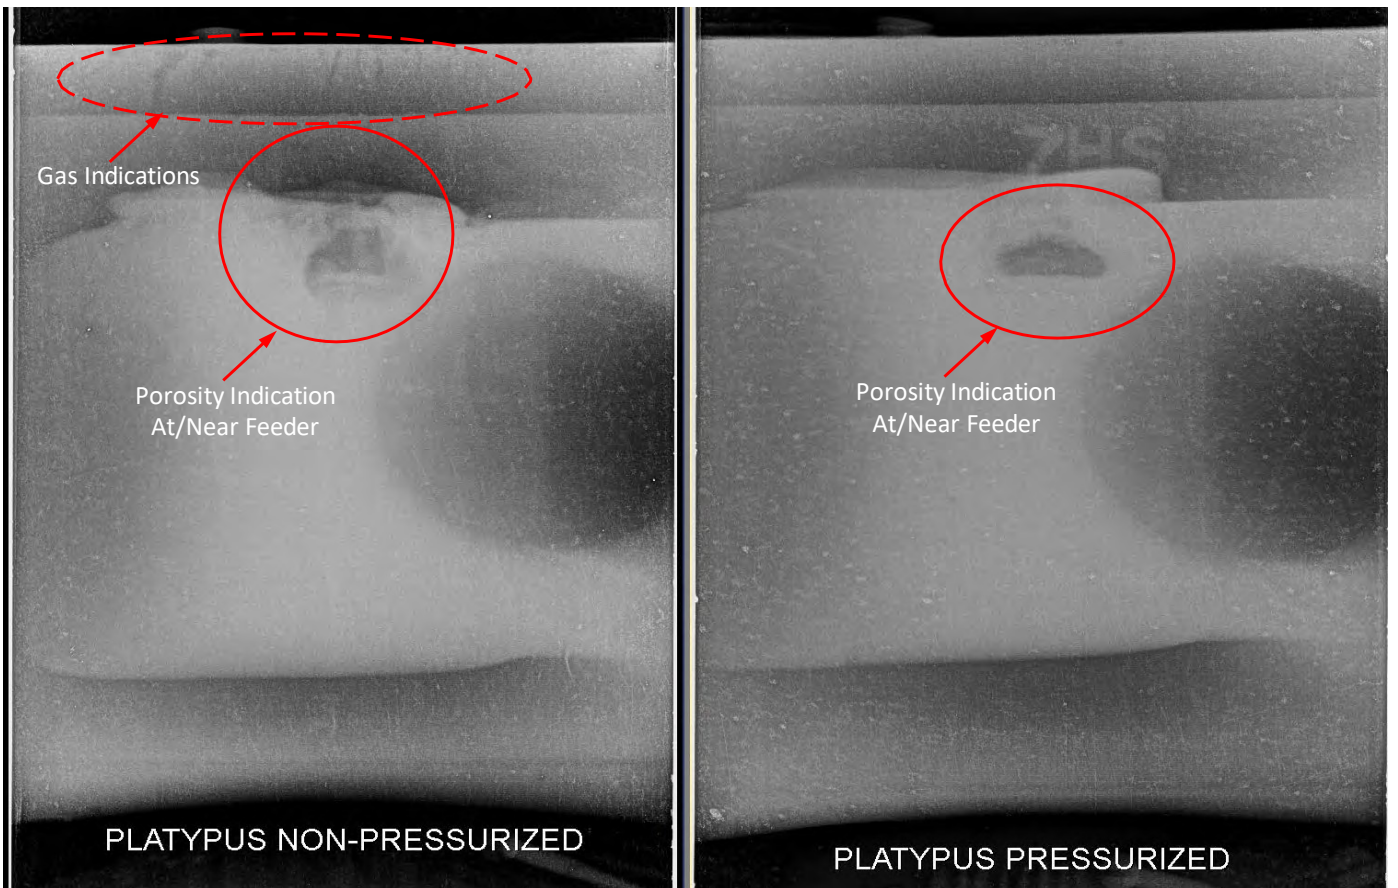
Radiographs from View 7 of un-pressurized and pressurized castings.
